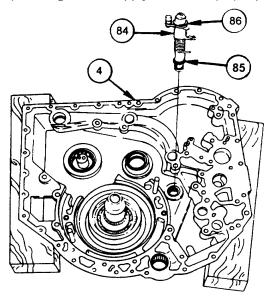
Right Brake Apply Cam Shaft. REMOVE RIGHT BRAKE APPLY CAM SHAFT – Cont.
